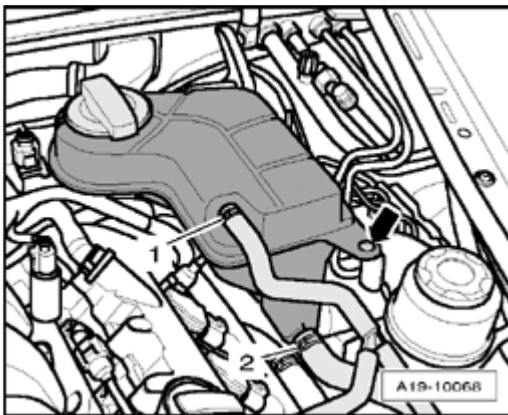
Removing Coolant Hoses At Coolant Expansion Tank
